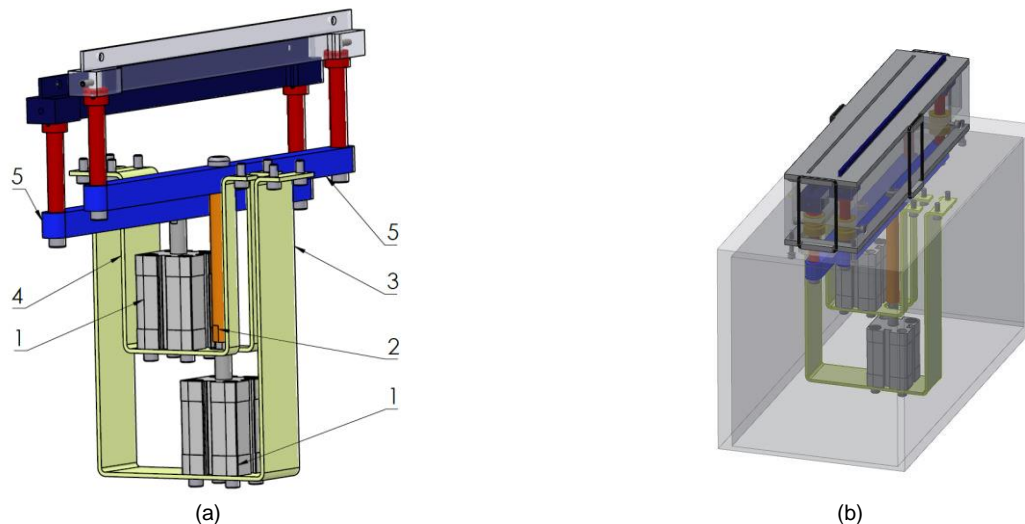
(a) Motion gear with rails and tie rods fitted. (1) Pneumatic drive, (2) piston rod extension, (3) pneumatic drive mount, (4) pneumatic drive mount, (5) tie rod connecting piece. (b) View of the prototype of the machine itself.
